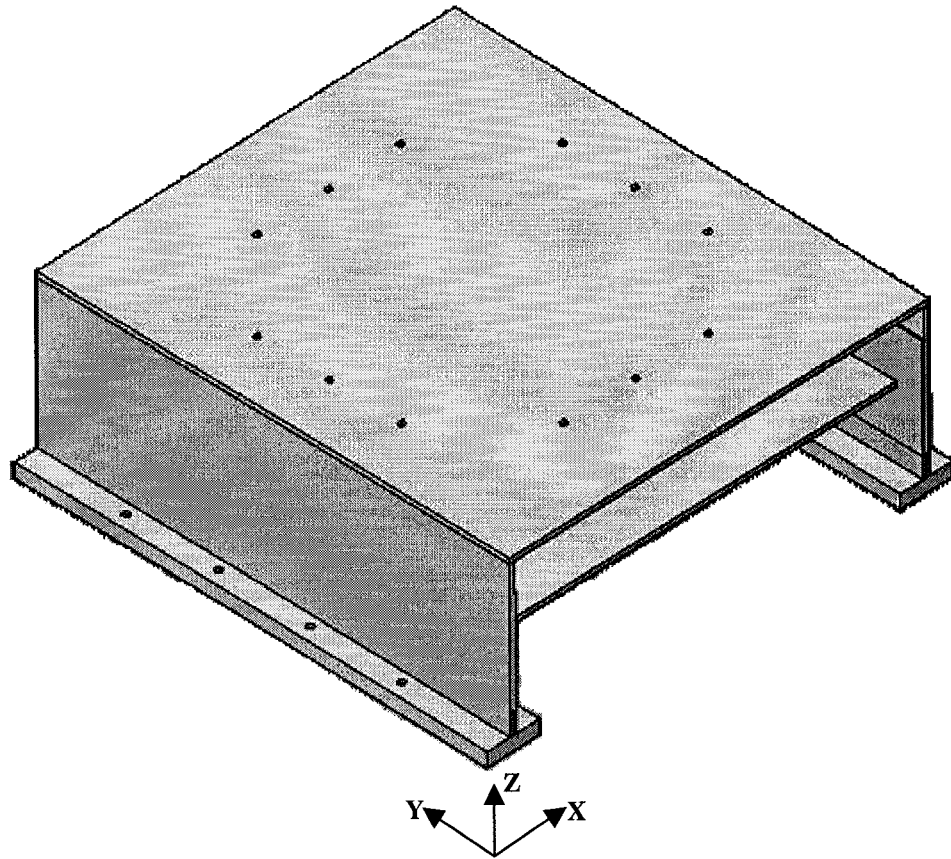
Mounting Structure indicating the attachment points for the test item.
